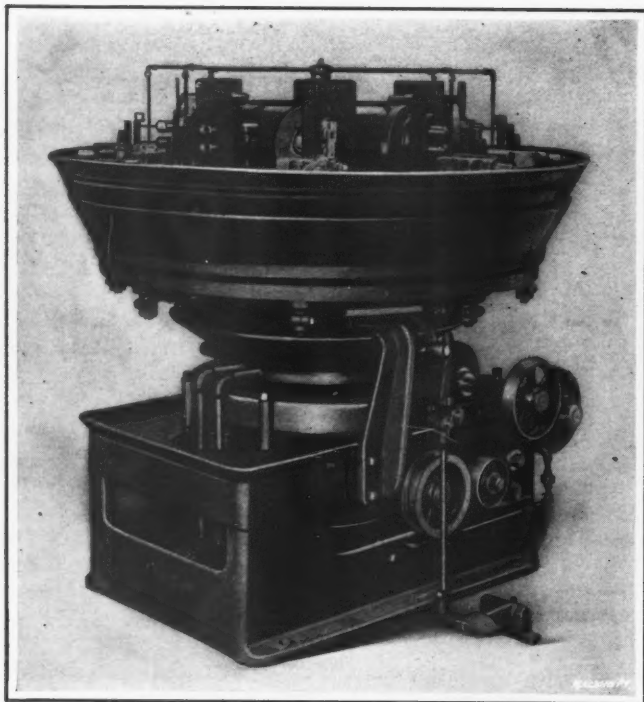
Langelier Semi-automatic Continuous-feed Drilling Machine equipped for drilling Cotter-pin Holes
